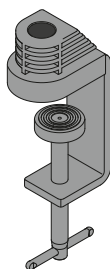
Fastening element. Fig. 2: Mounting the light to the fastening element.
